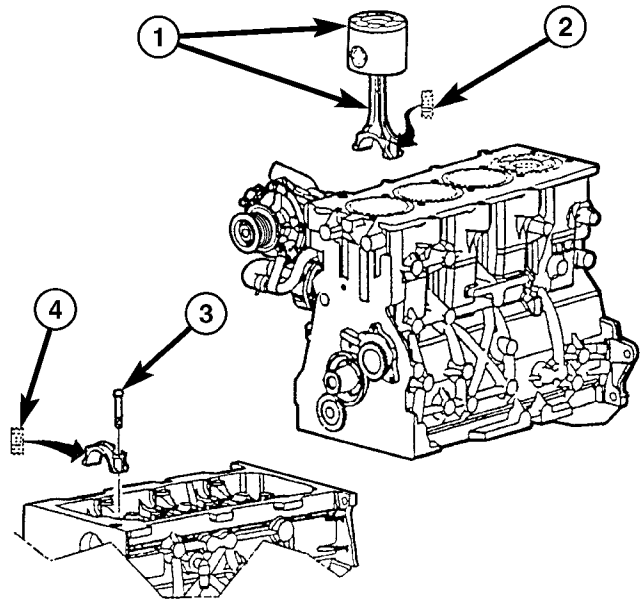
PISTON AND CONNECTING ROD INSTALLATION
